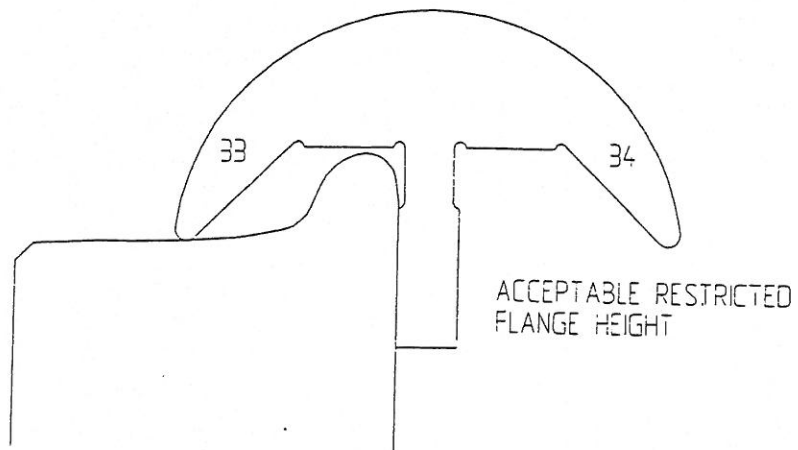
GO/NO-GO RESTRICTED FLANGE HEIGHT GAUGE
